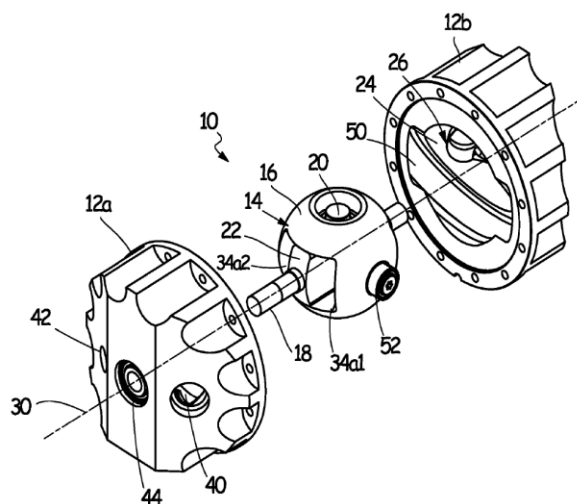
an exploded view of the turbine assembly (Fenton, 2021)
